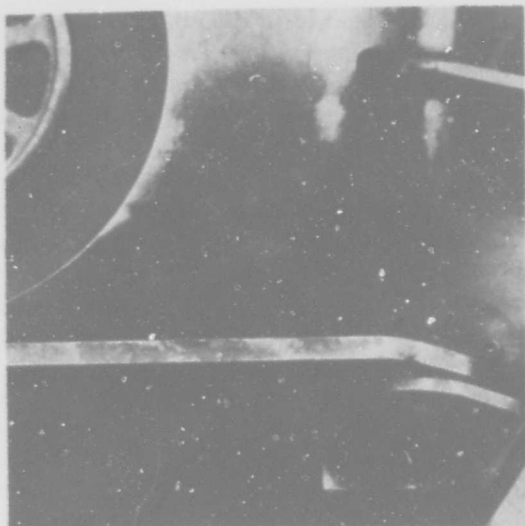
Failure of chromium plating on hatch hinge.
